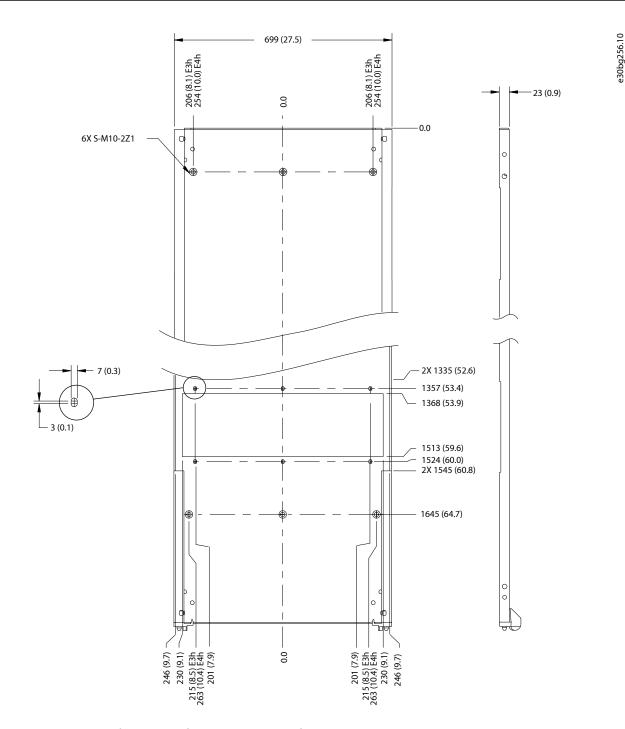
Vent Dimensions for Mounting Plate in 800 mm (32 in) Cabinet
